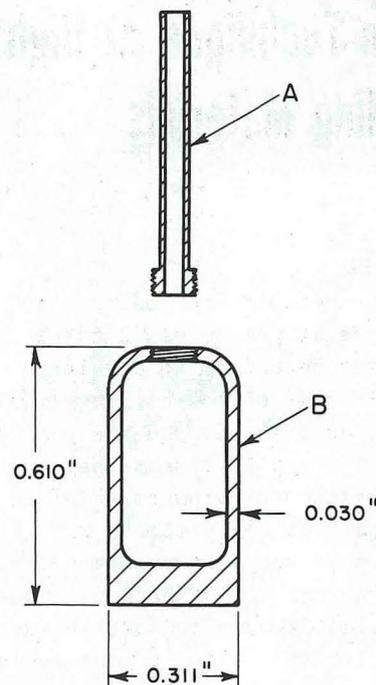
Capsule for  $1/2$ -in. furnace assembly: A - Stem, od 0.070 in., id 0.046 in.; B - capsule body, grade A nickel
